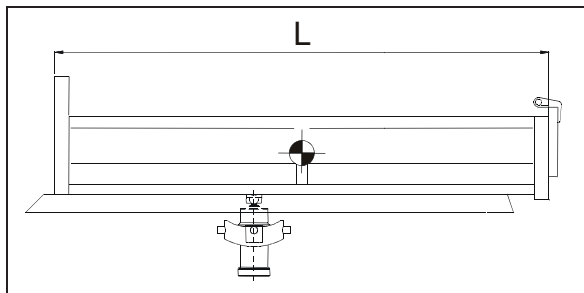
CYLINDER MOUNTING POSITION (L= BODY LENGTH)
